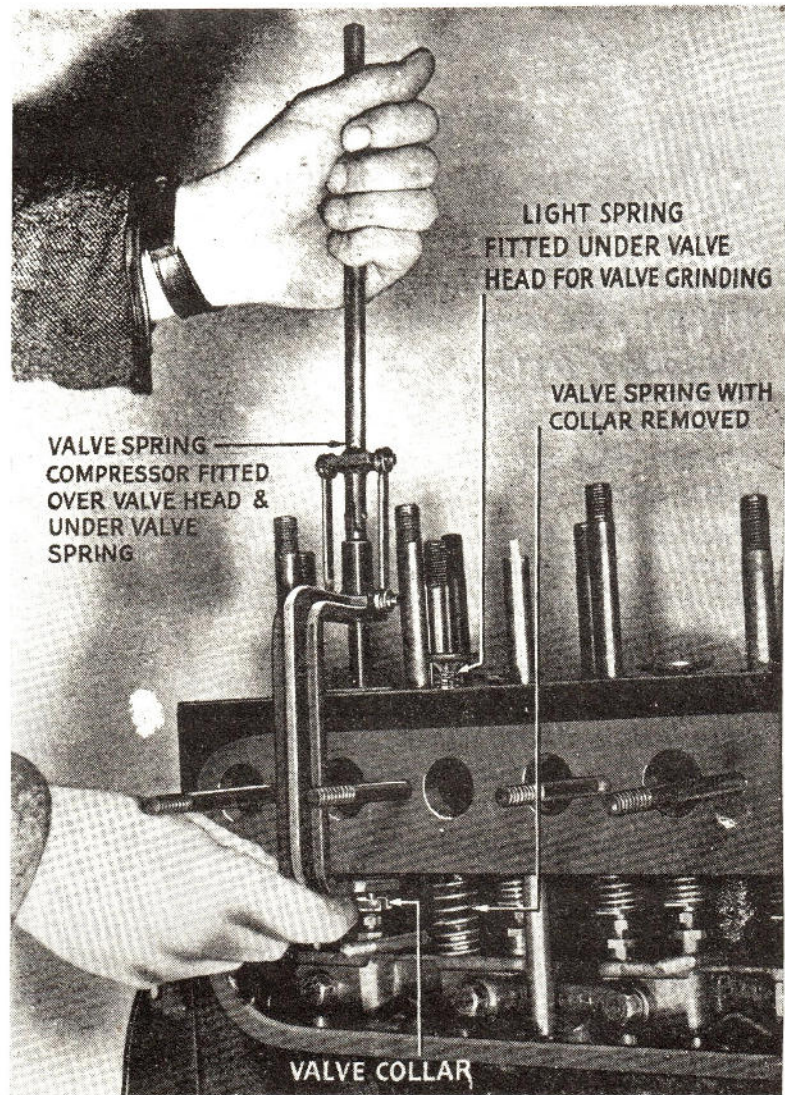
Showing use of valve spring compressor without removal of tappets.
